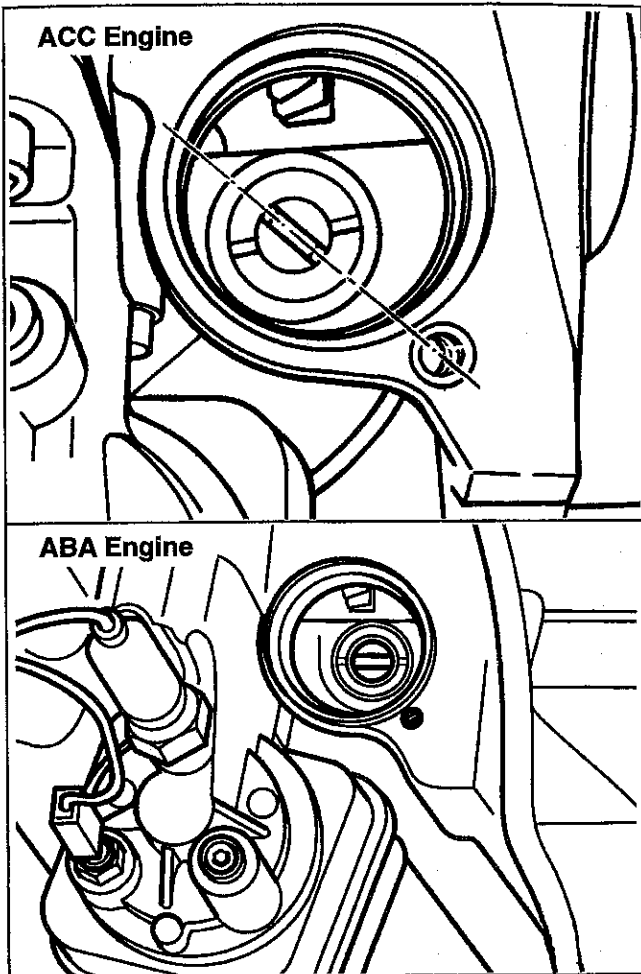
Engine set to TDC, cylinder no. 1. Position crankshaft (top) and camshaft (bottom) so that TDC marks align as shown.
